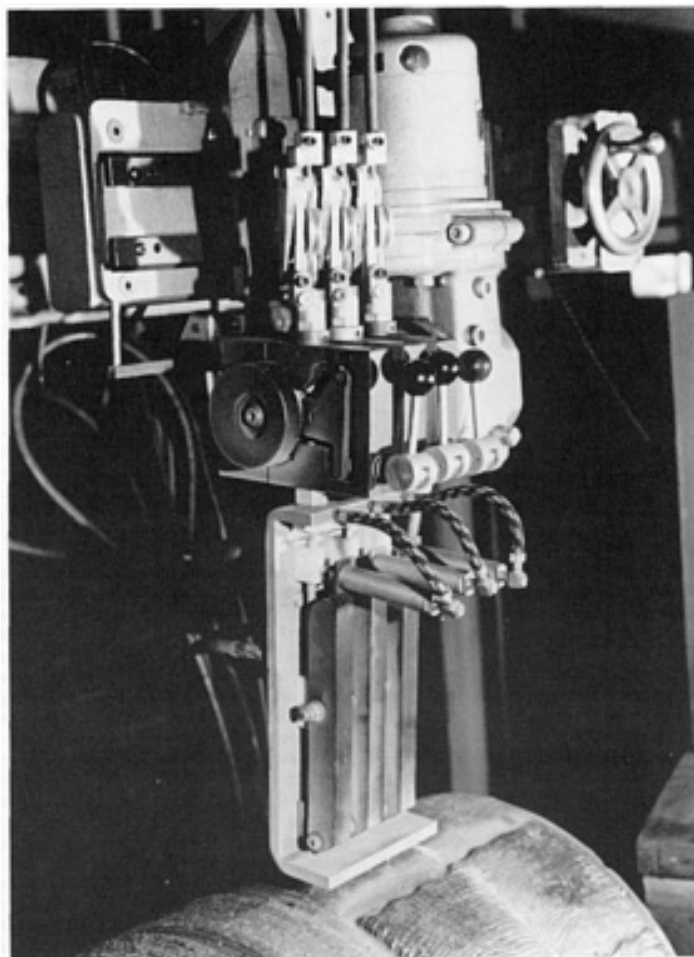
THREE-WIRE WELDING HEAD FOR WELD CLADDING APPLICATIONS. COURTESY OF STOODY COMPANY
